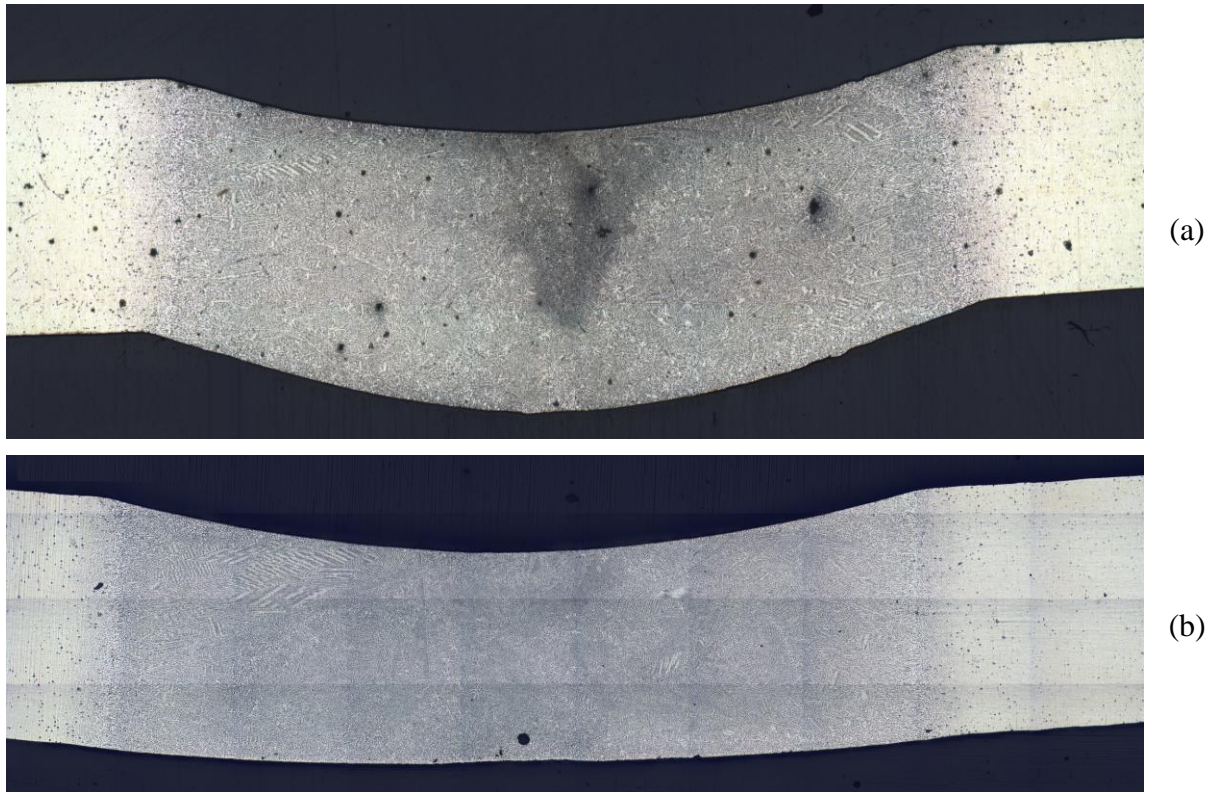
Diode laser weld transverse section made at: a) 3 kW and 0.50 m/min, and b) 4 kW and 0.75 m/min on 2 mm thick sheet.
